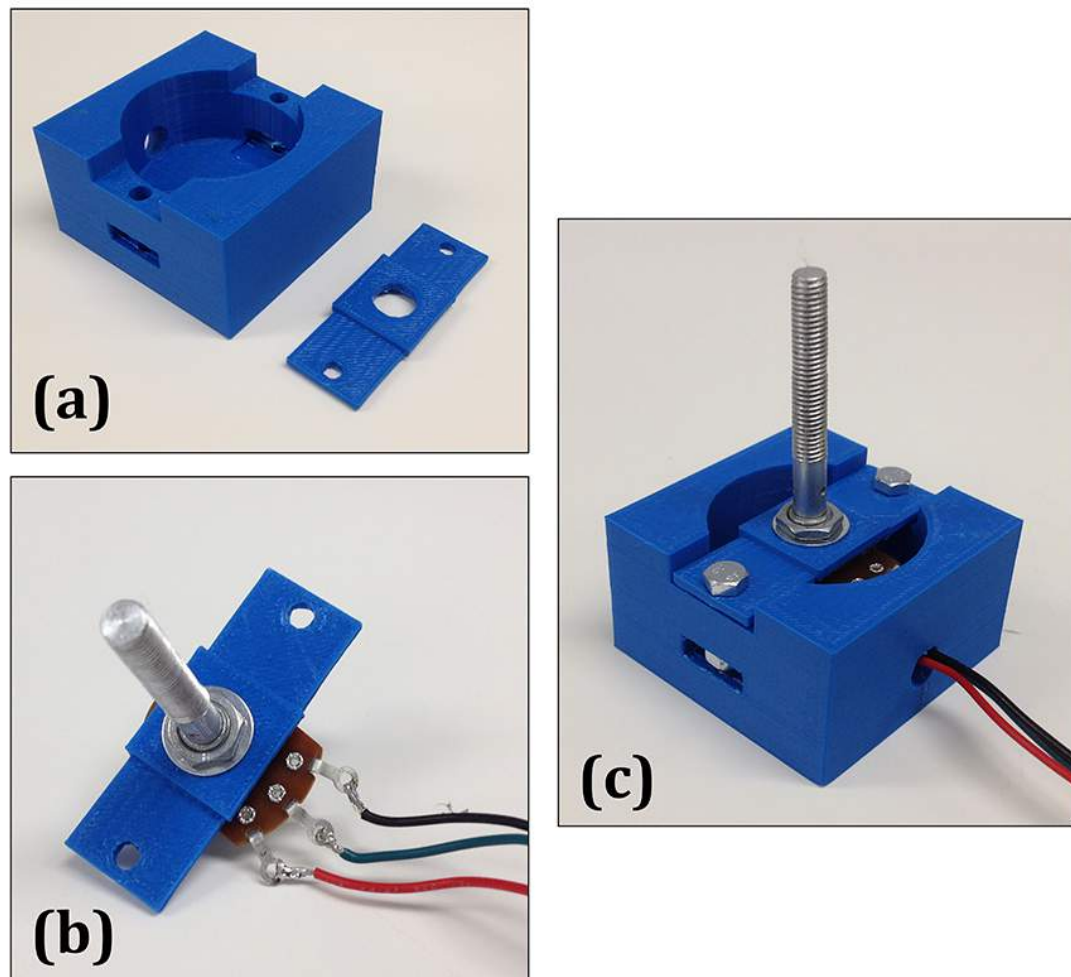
(a) Printed part with modified joint surface and mounting bracket. (b) Joint encoder assembly is installed into bracket (c) Bracket with mounted joint encoder assembly is installed in joint surface using bolts through the bracket attached with nuts accessed in the installation access tunnel.
